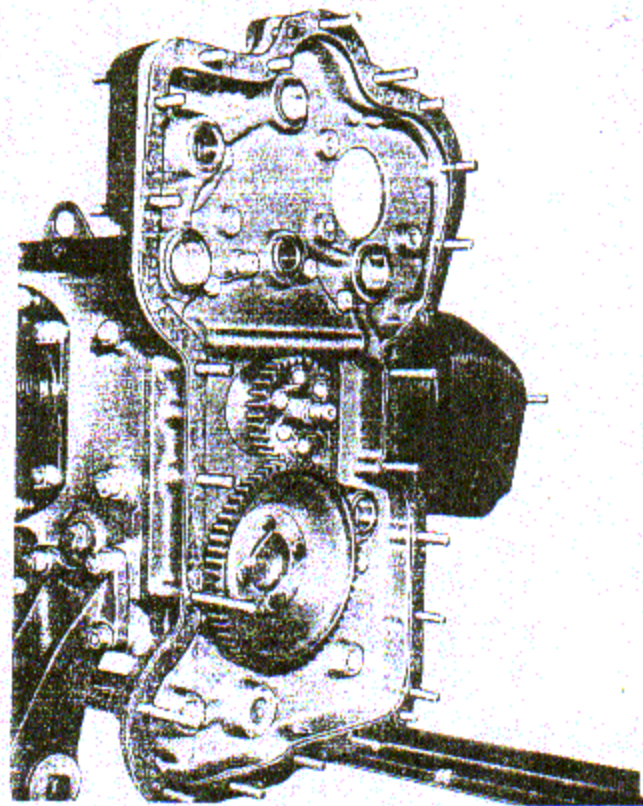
Accessory Case Front Half and Timing Gears Installed
